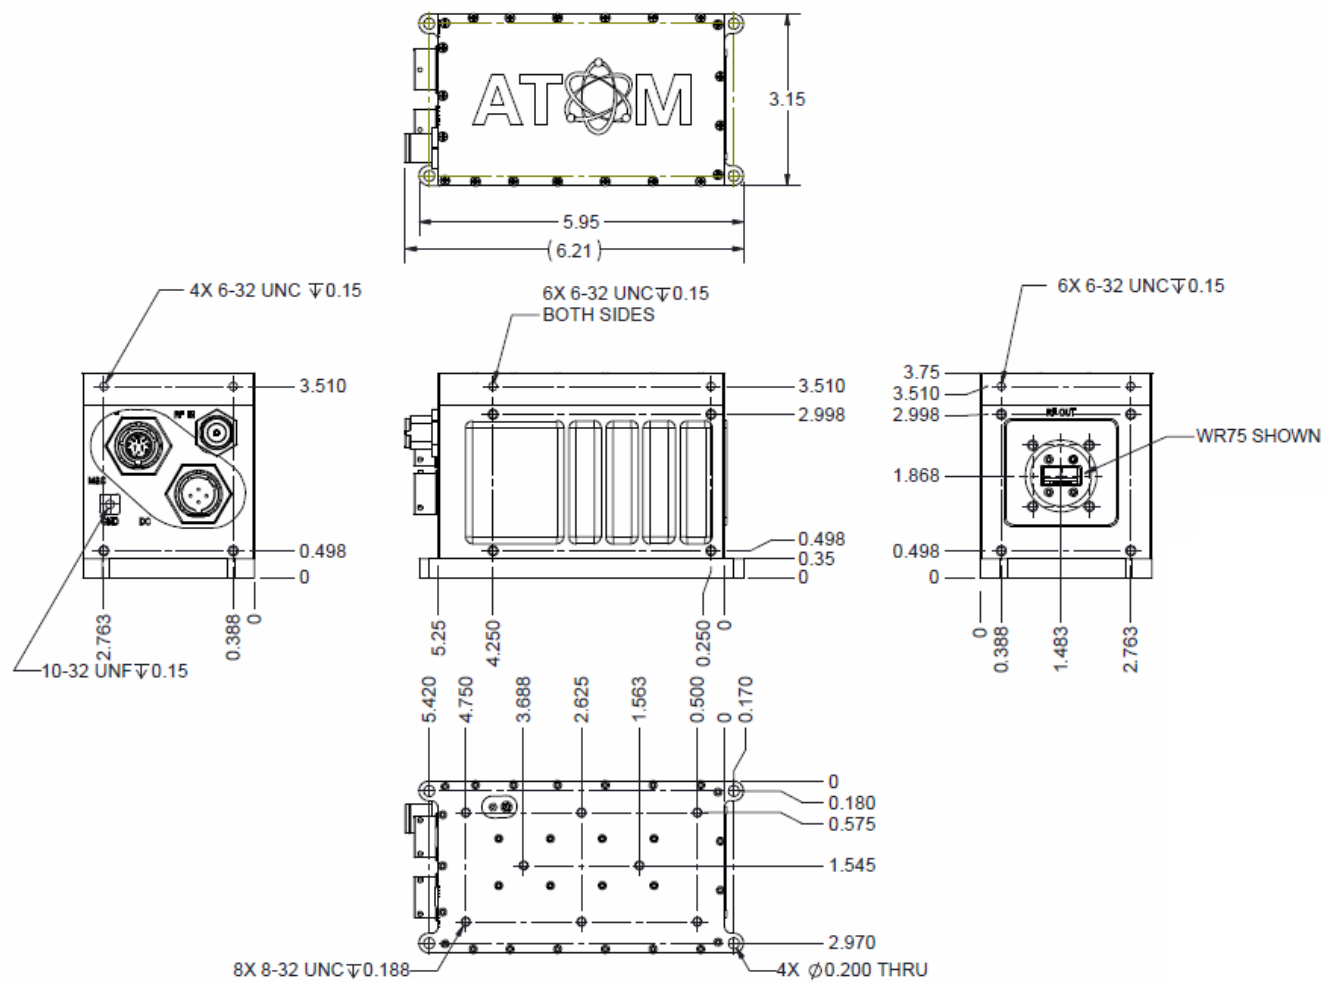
40W and 50W KU SSPA/BUC Assembly, without Fans
